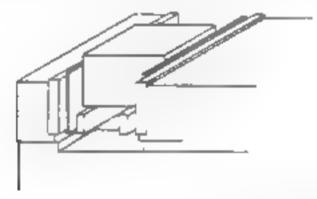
Protecting vise jaws with soft metal shims when holding rough workpieces.
